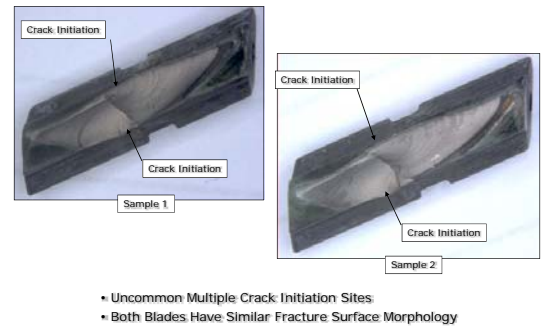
ETF40B 6th Stage Blade Fracture Surfaces
